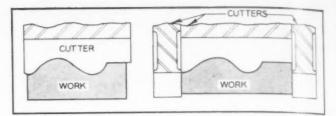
, at left, shows a typical formed cutter for milling an irregular shape. Only grinding the face of the teeth is necessary, and the form is maintained throughout the life of the cutter. However, formed cutters may be "ganged" with side milling or other cutters, as shown in Fig. 6 at right. For a part as shown, lateral spacing of the side milling cutters is effected by shims and only ordinary care is required for their resharpening.
